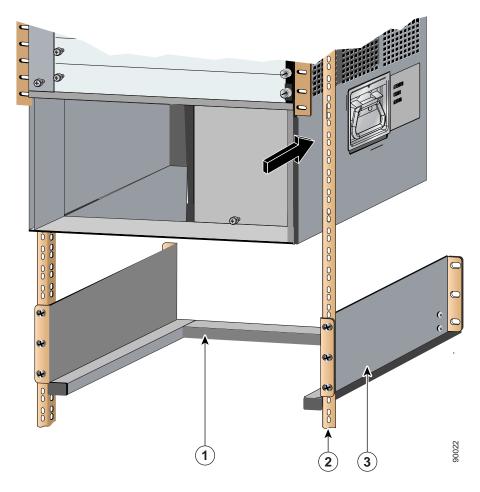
Attaching the Crossbar to the Side Rack-Mount Brackets (Rear View)
